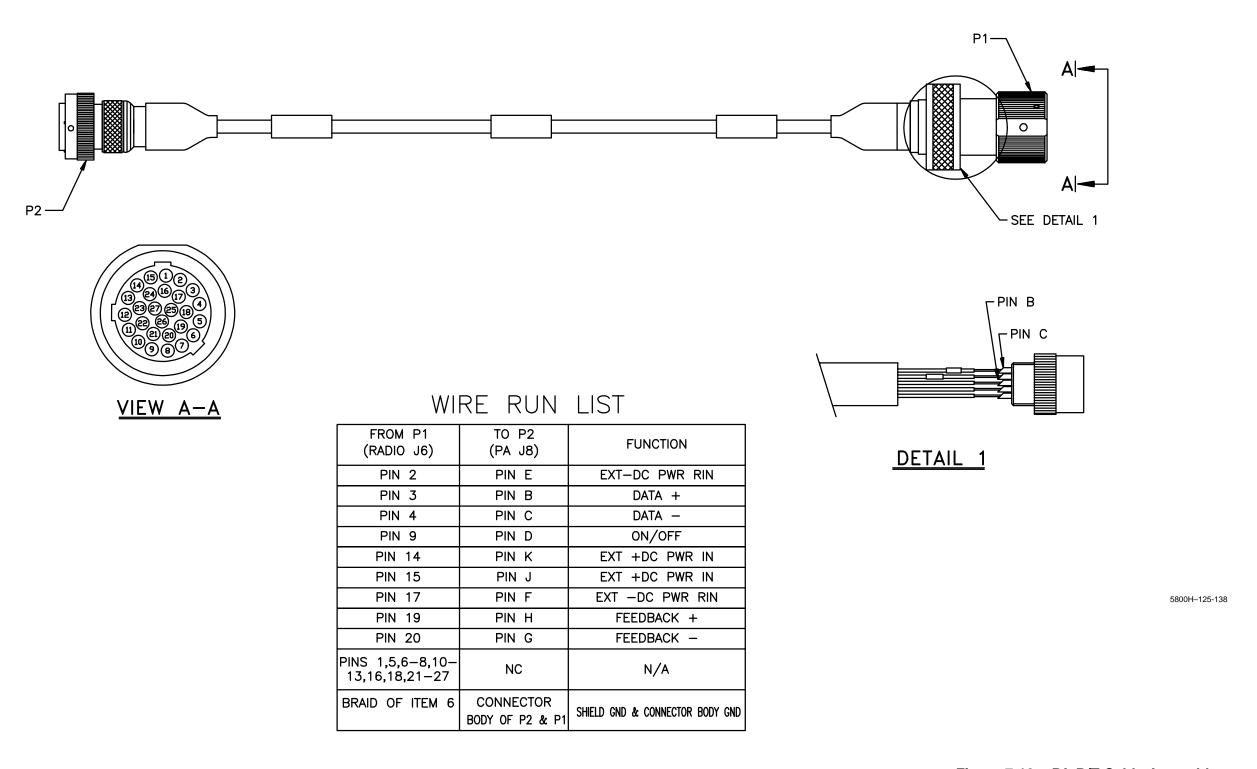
PA-R/T Cable Assembly (10535-0720 Rev. B)
